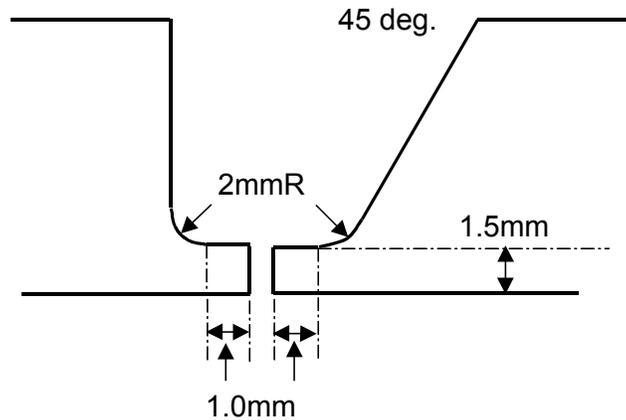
Schematic illustration of edge preparation for welding.
